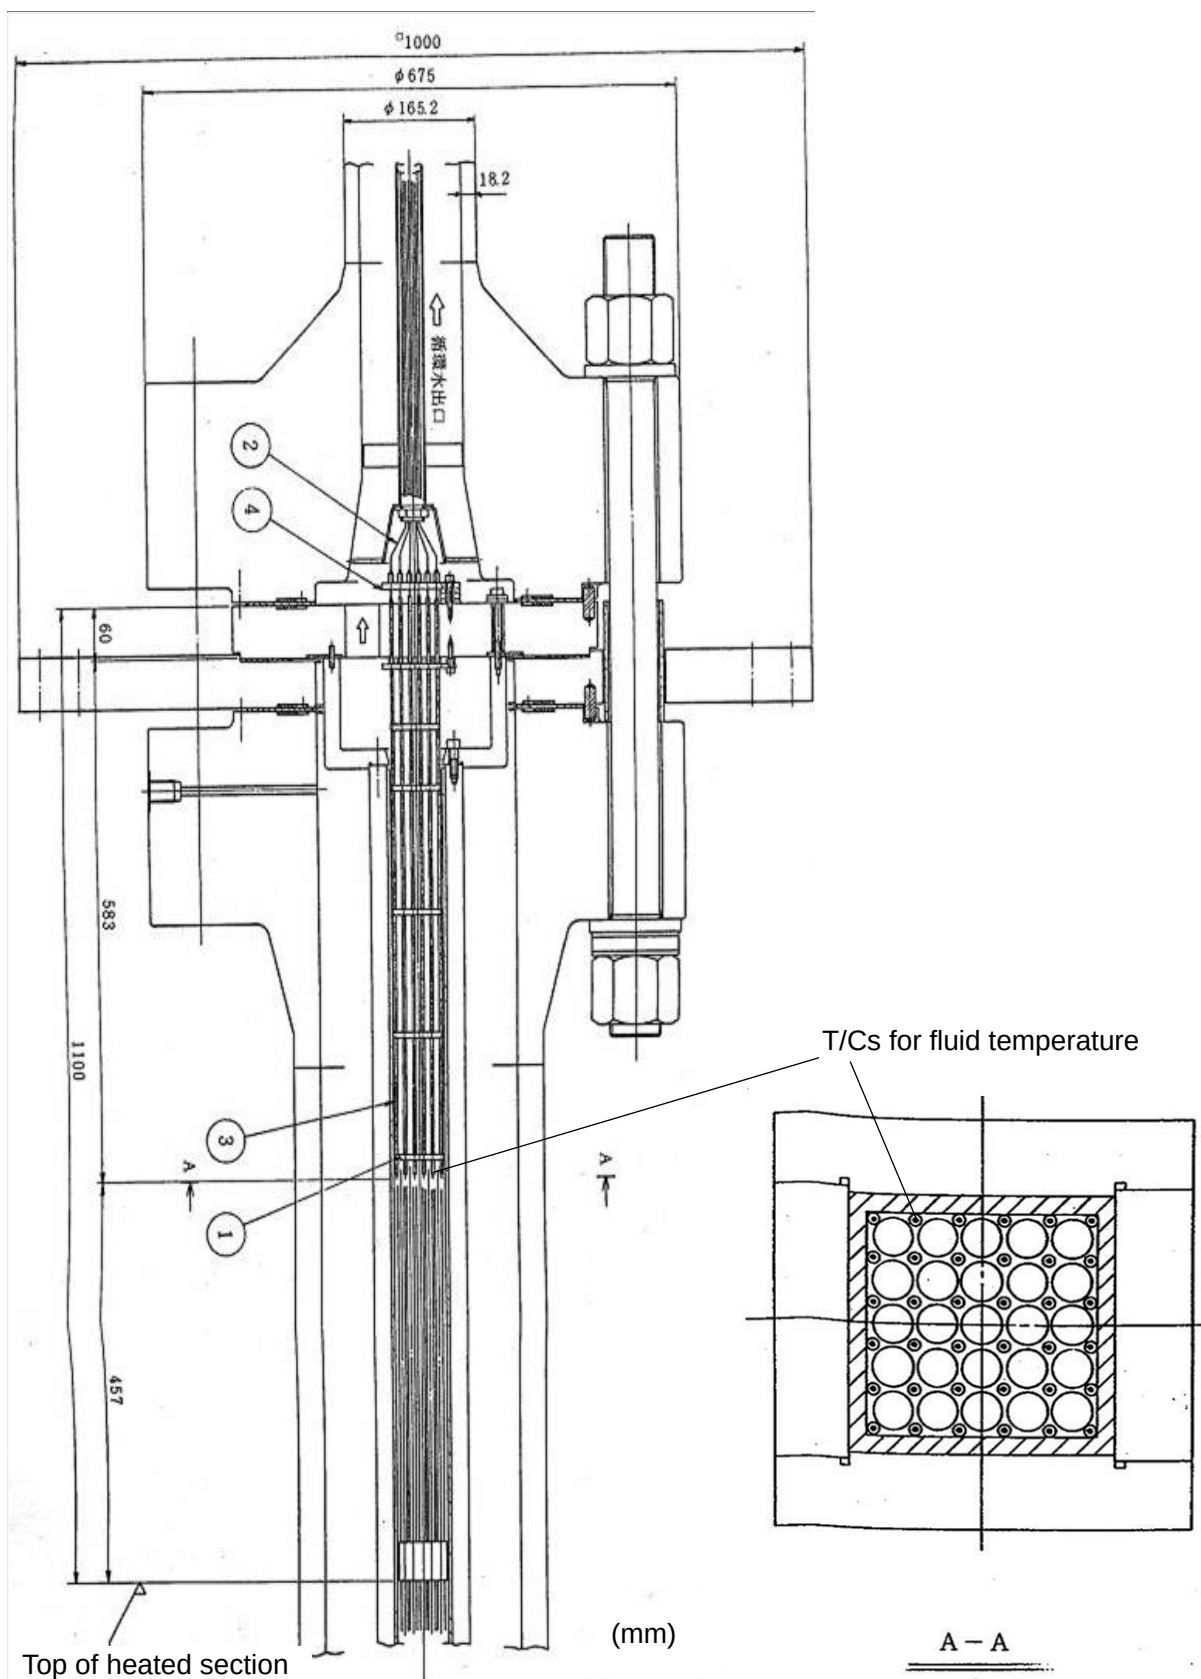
Fluid temperature measurements in test assembly A1
